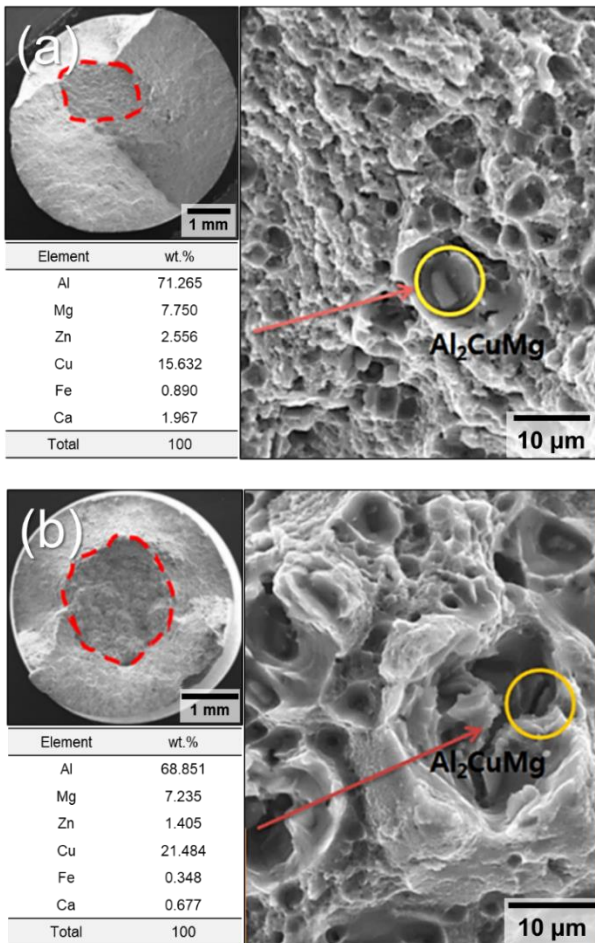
Tensile fracture surfaces of (a) modified AA7075-T6 and (b) modified AA7075-T73 alloys
